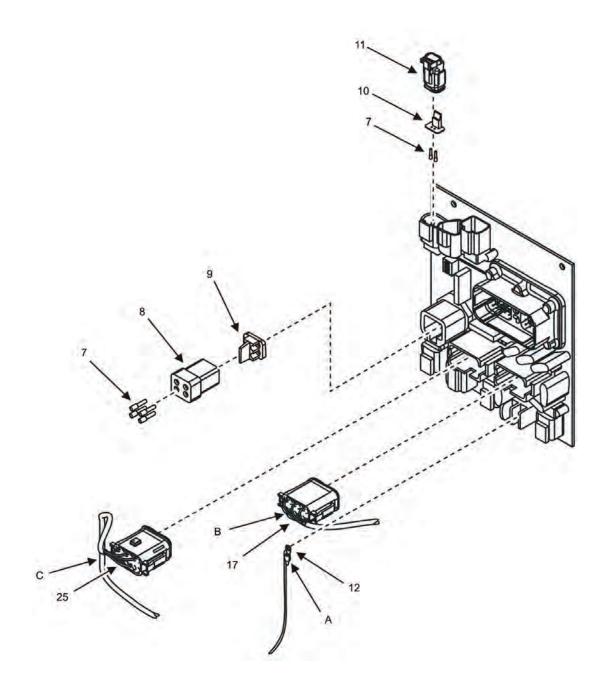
Printed Circuit Board Module (Sheet 2 of 3).
